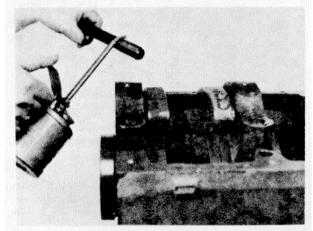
N-6. Lubricate the Main Bearing Capscrew Threads
